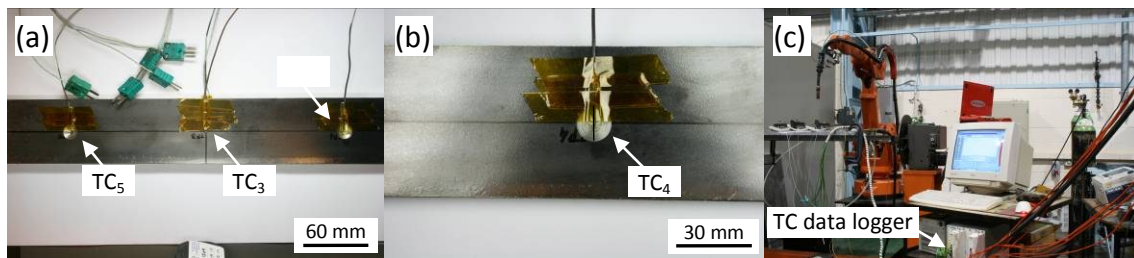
Thermocouples arrangement on the substrate bottom side after spot welding (a) TC_3 , TC_4 and TC_5 , (b) detailed view of TC_4 (13 mm hole drilled), and (c) general view of the data logger.
